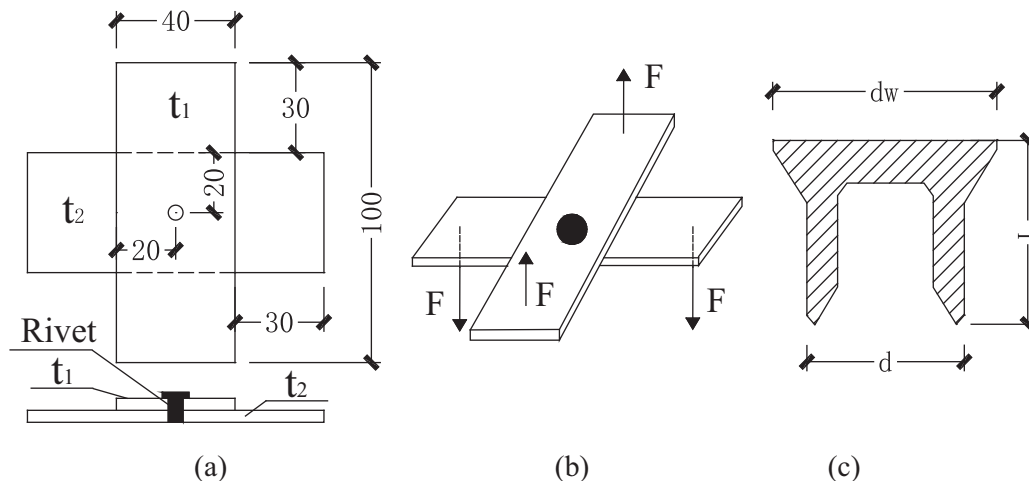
Diagram of cross-tension SPR joint: a) connection specimen, b) loading direction, c) rivet cross-section.
